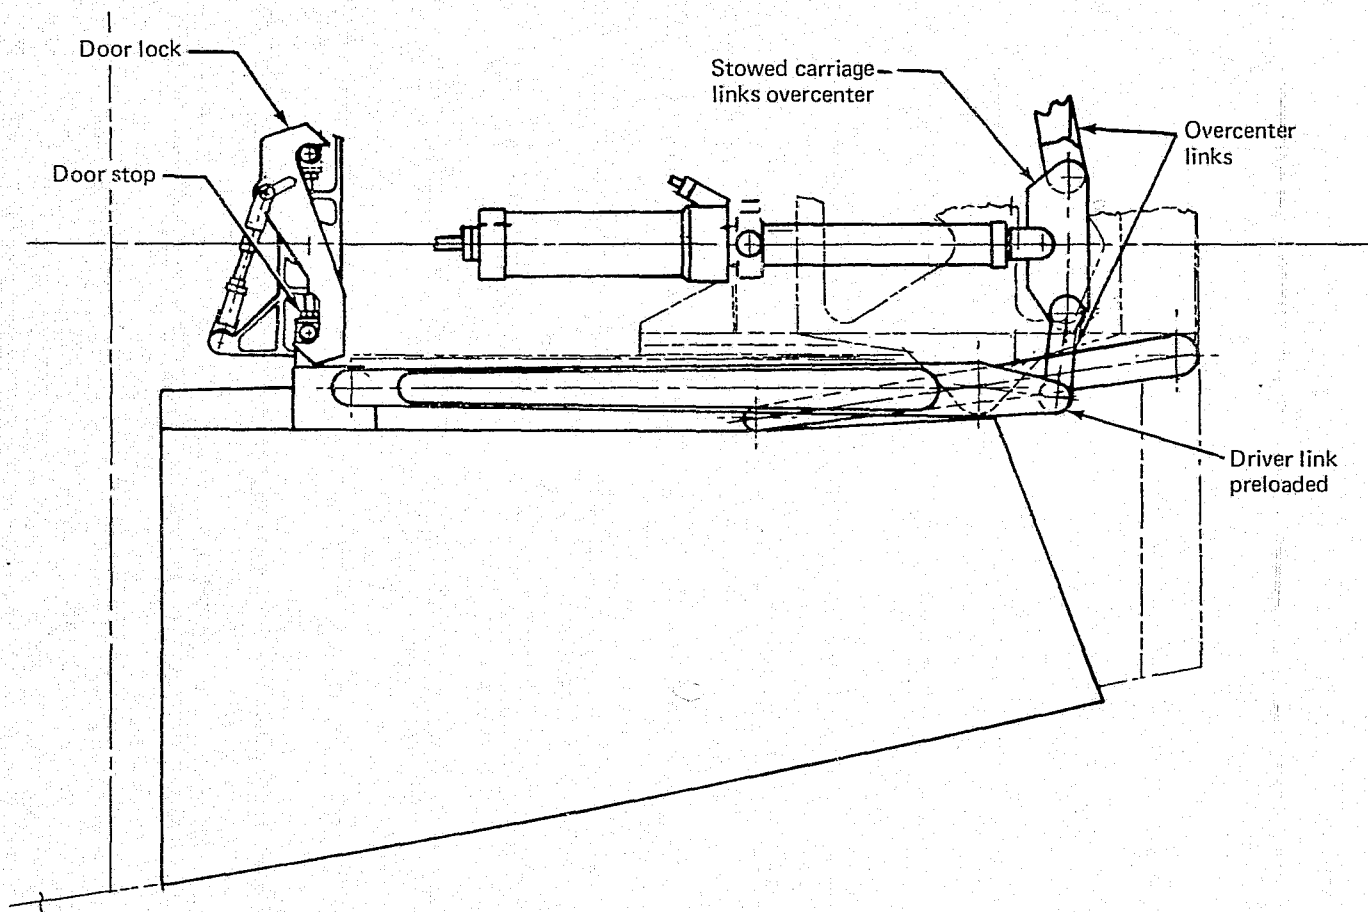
JT8D Refan Thrust-Reverser System—Doors Stowed and Locked
